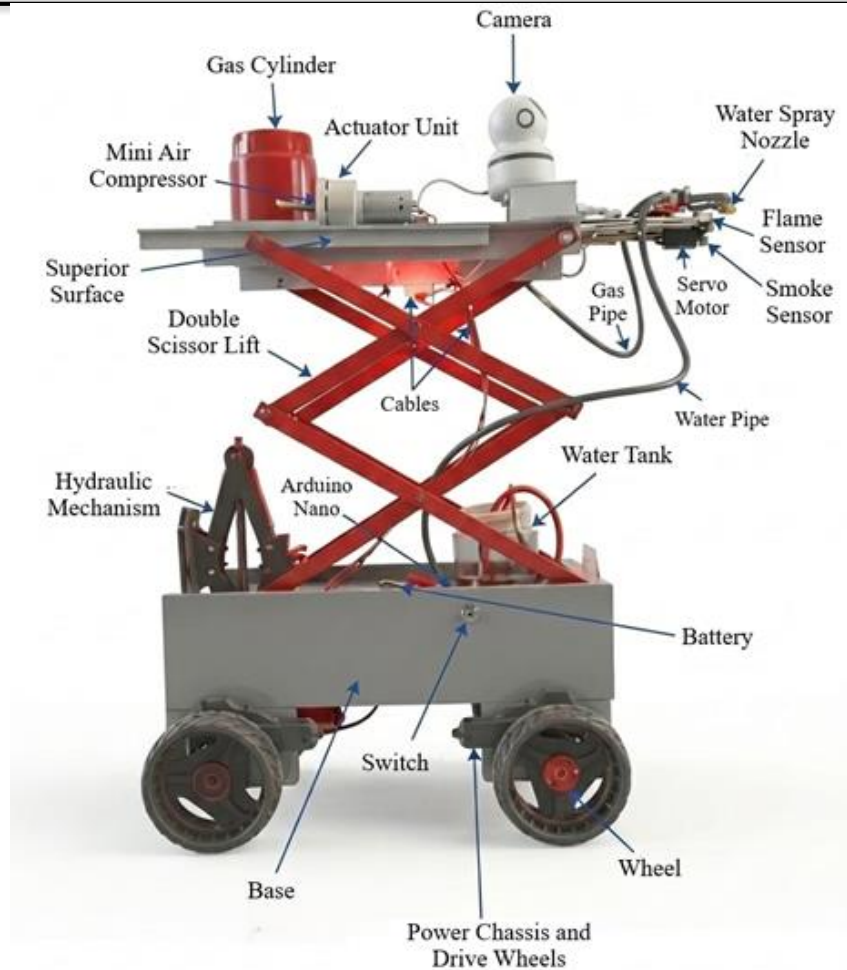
Labeled View of the Firefighting Robot Showing all Major Components.
